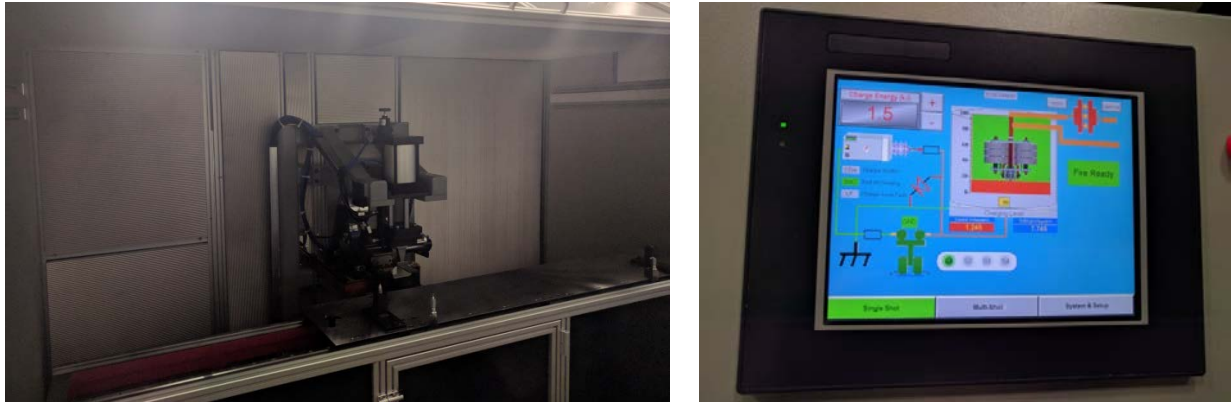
K.19. Pedestal welding machine. The welder and fixture table (left) and human-machine interface (right).
